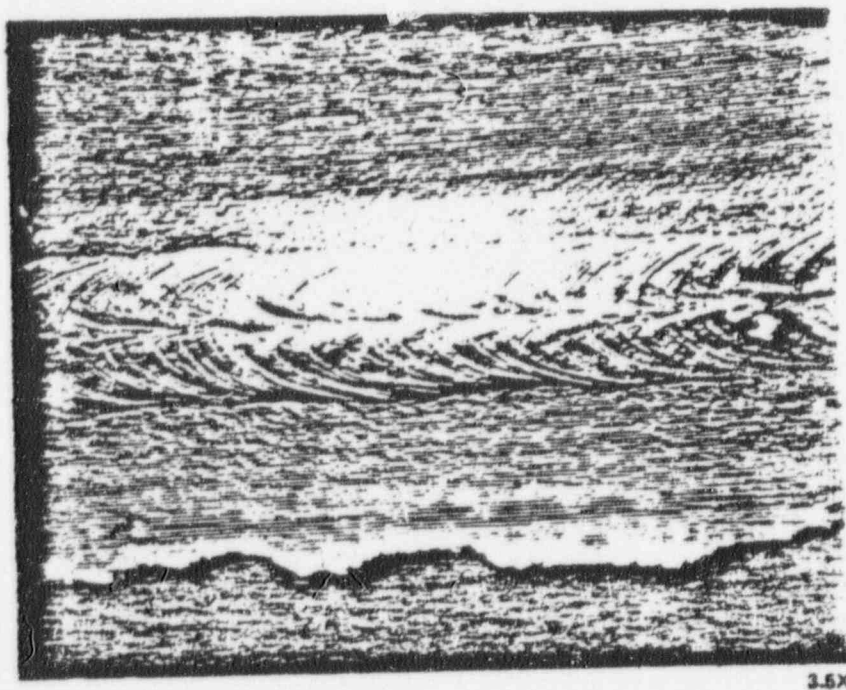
Weldment E19B Showing As Machined Surface 125 RMS
